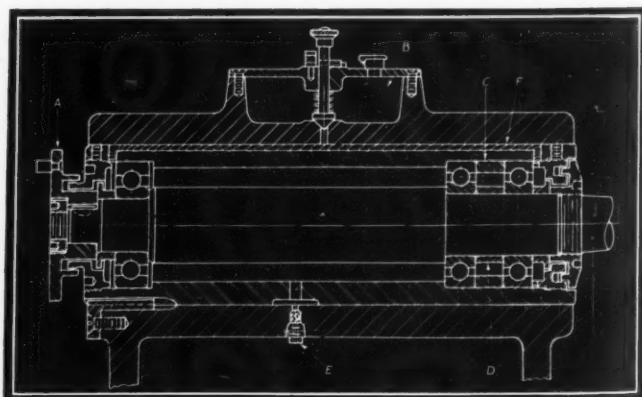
Two-piece design for which flexible coupling at *A* is employed for connecting the units. Note lubrication reservoir above spindle
